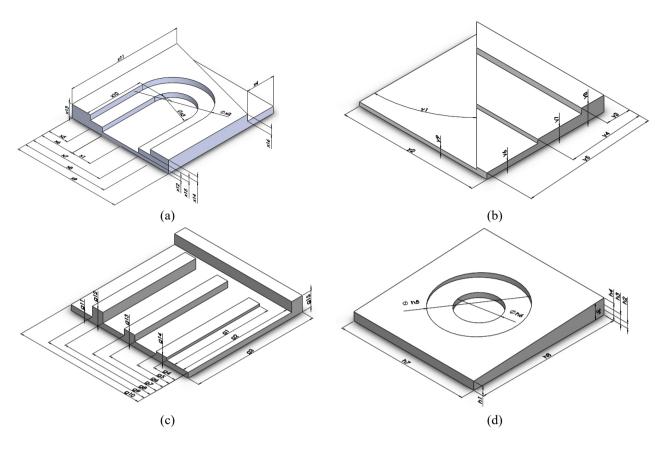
Isometric view for test piece (a) X; (b) Y; (c) G, and; (d) H
